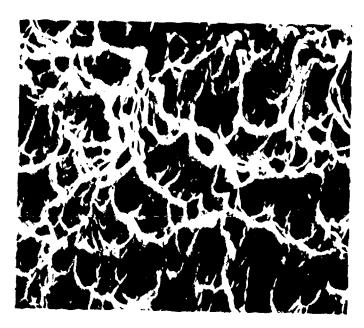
Tensile overload region of a fatigue fracture surface of an A-514 weldment containing LOP, 3250x.
